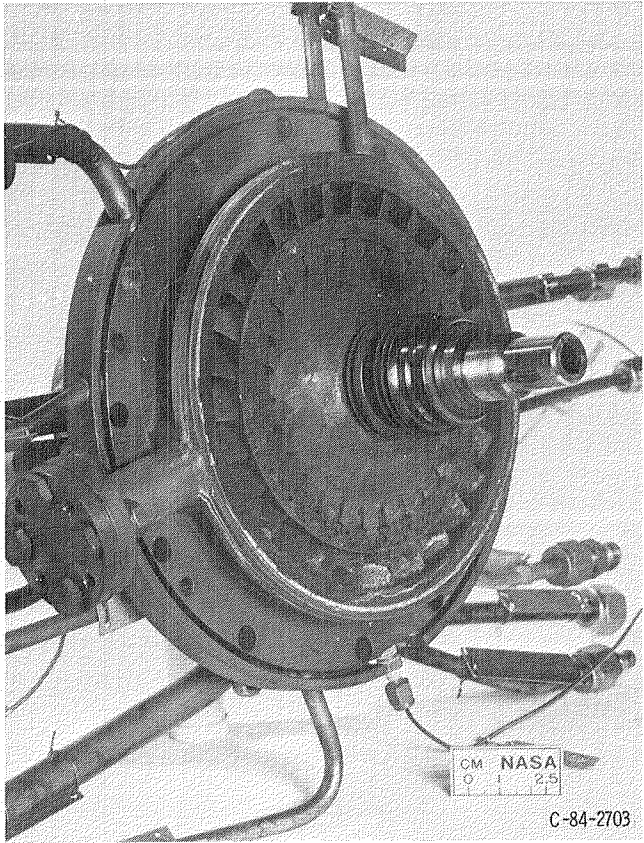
Turbine rotor and corroded blades in the inlet half of the housing.
